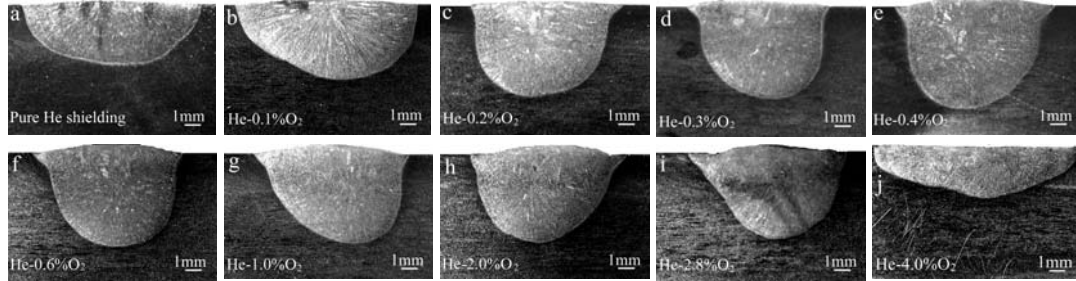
Weld shapes under different He-O₂ mixed shielding gases. (160A, 2mm/s, 3mm arc length)
